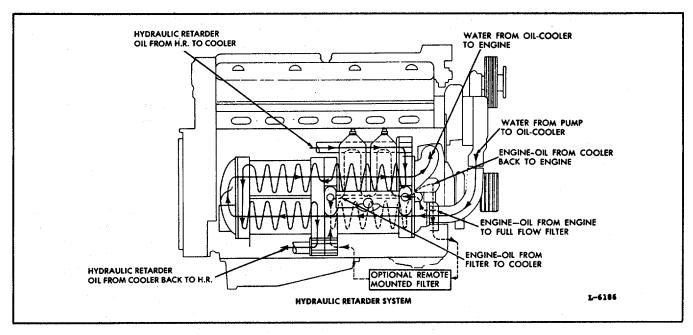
Tube-type Oil Cooler Flow Diagrams
